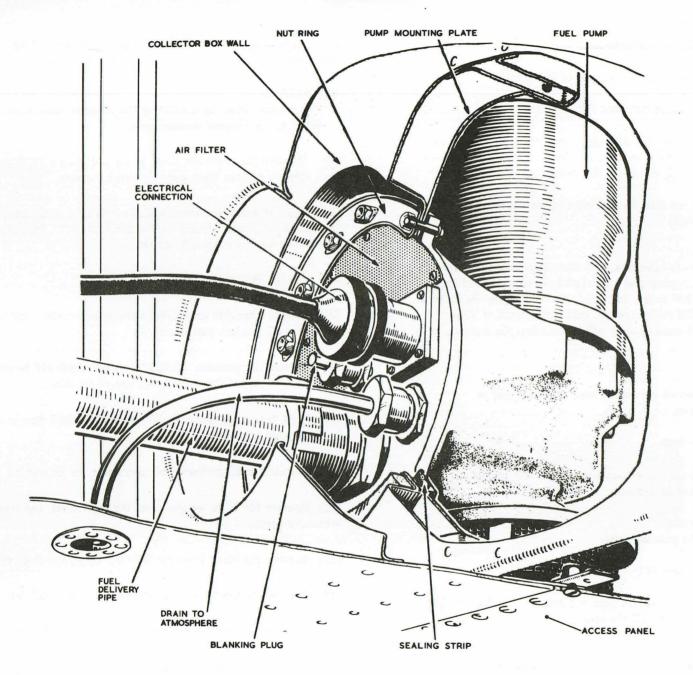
FUEL PUMP INSTALLATION-INTEGRAL TANKS
